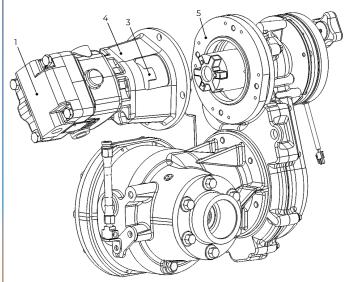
Disconnecting Motor, coupling 7/8 and motor-differential adapter.
